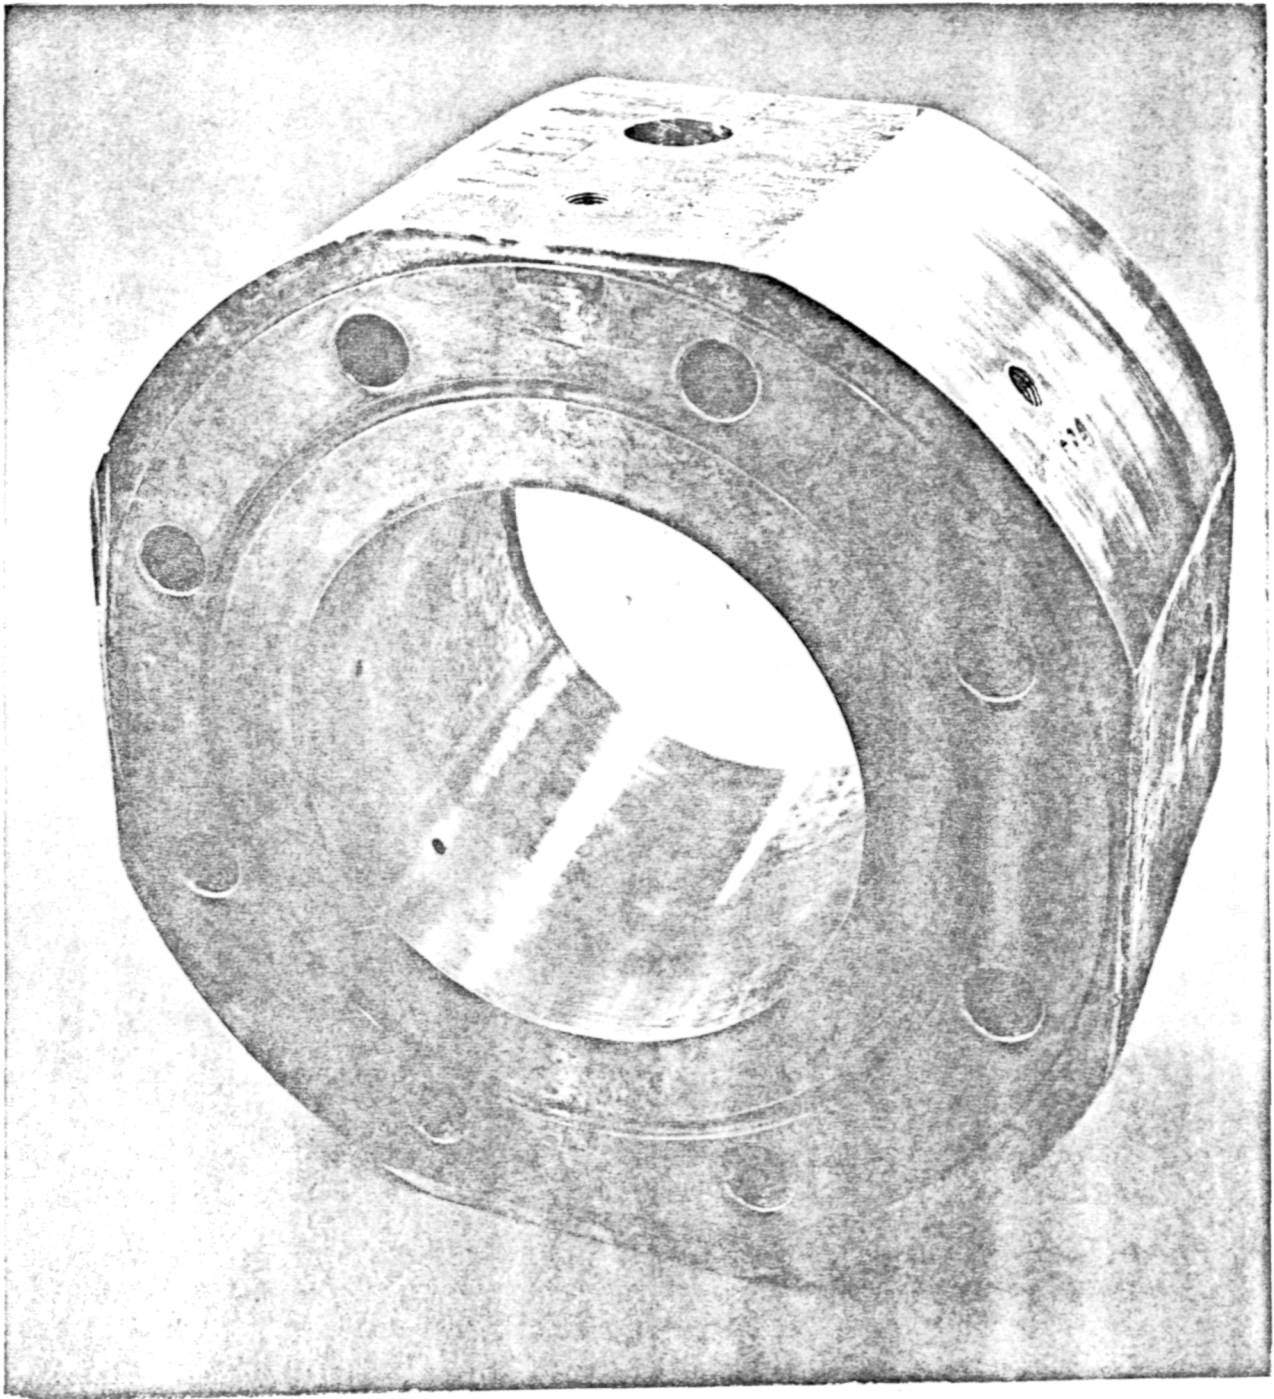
Combustion Chamber Extension -- 5.0 Inches
